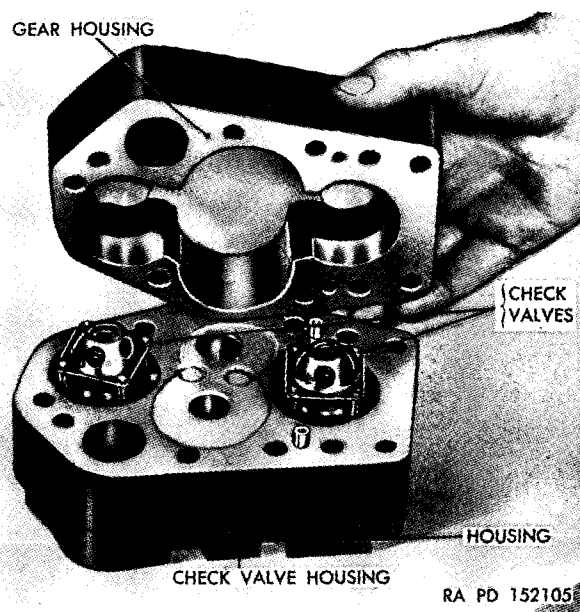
Removing or installing output-brake and pressure-pump gear housing.
